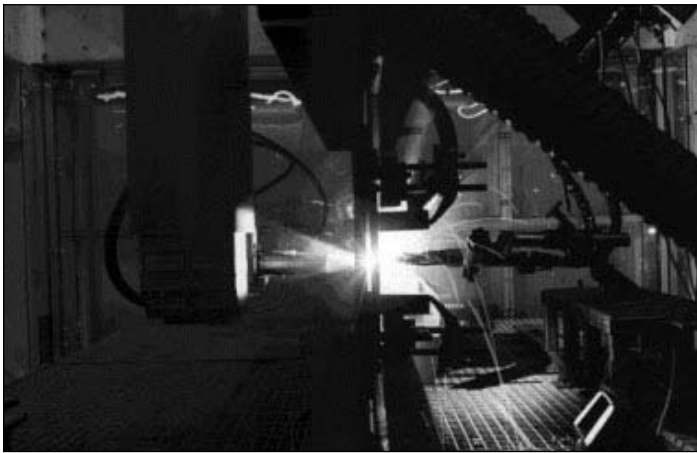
Dual process welding using the 25 kW CO₂ laser at Corus' Scunthorpe works. The laser head and the offset arc welding gun can be seen on the left and right of the photo respectively
